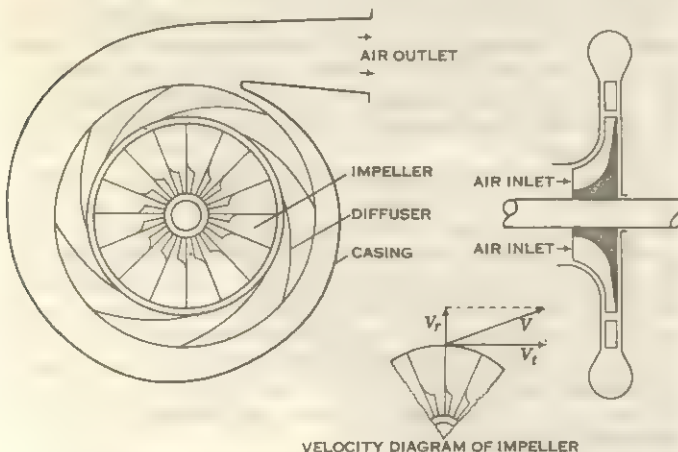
DIAGRAM OF IMPELLER, DIFFUSER AND CASING FOR A CENTRIFUGAL COMPRESSOR
